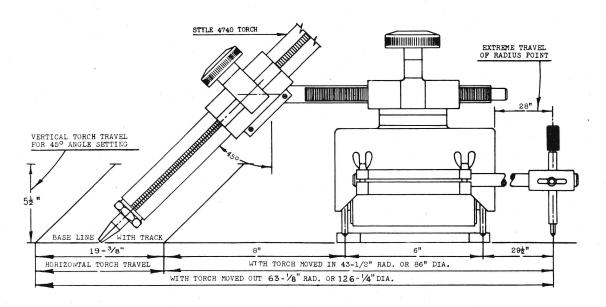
B - Straight Line and Large Circle Cutting with Torch at 15° Angle
